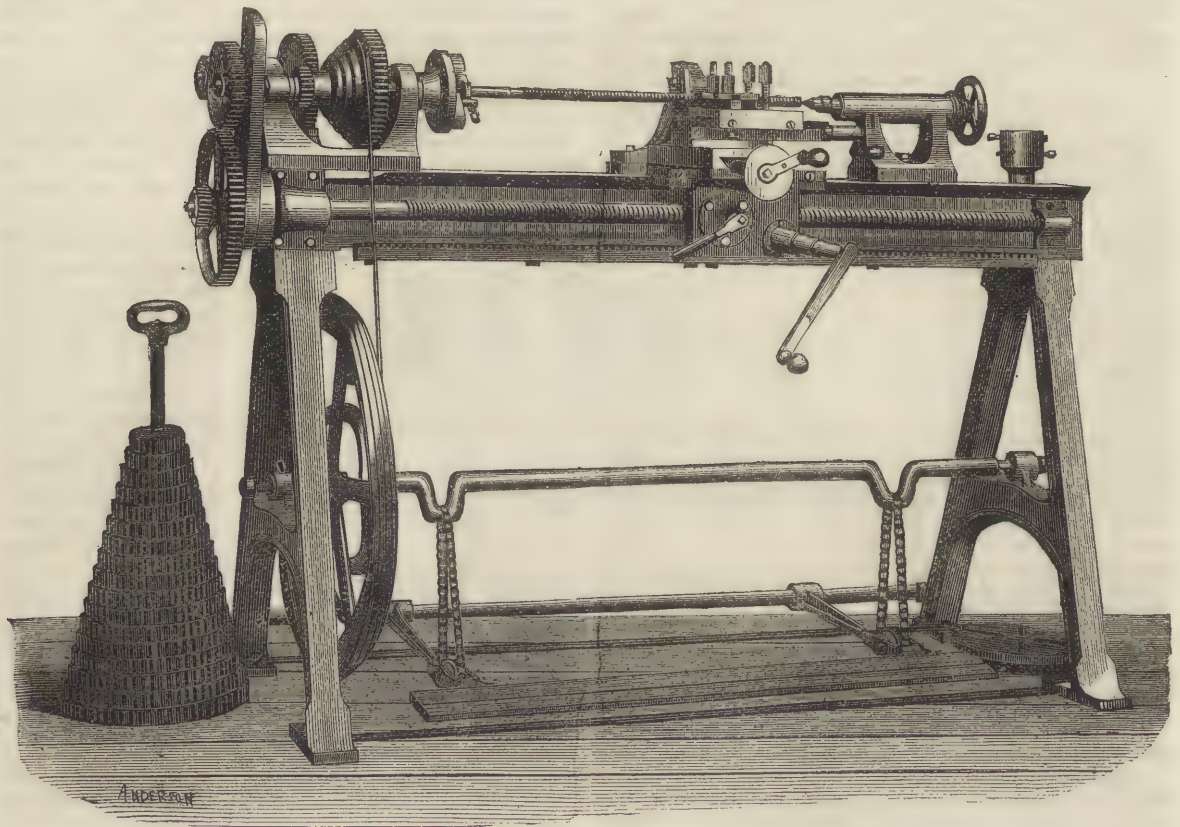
AMATEUR LATHE MADE BY MR. MUNRO, OF LAMBETH.
